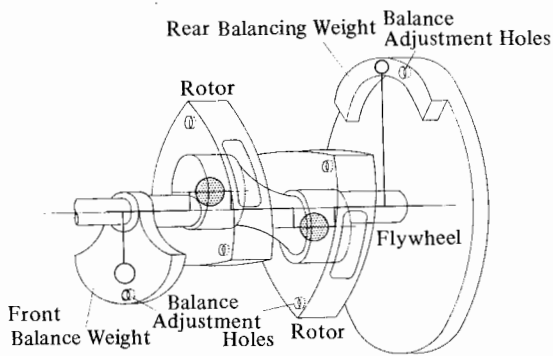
Arrangement of balance weights for a 2-rotor engine
